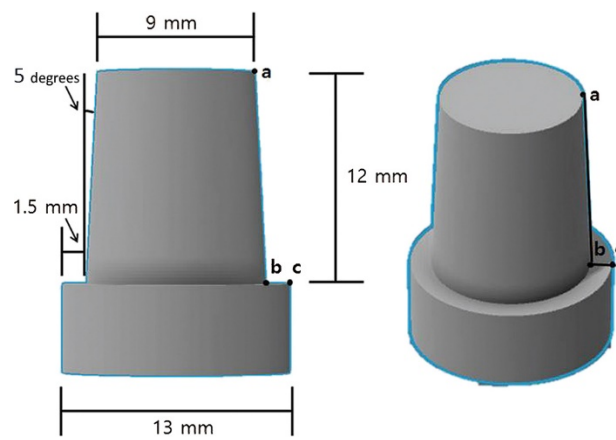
Specimen design for 3D printing accuracy test (Park and Shin, 2018).
